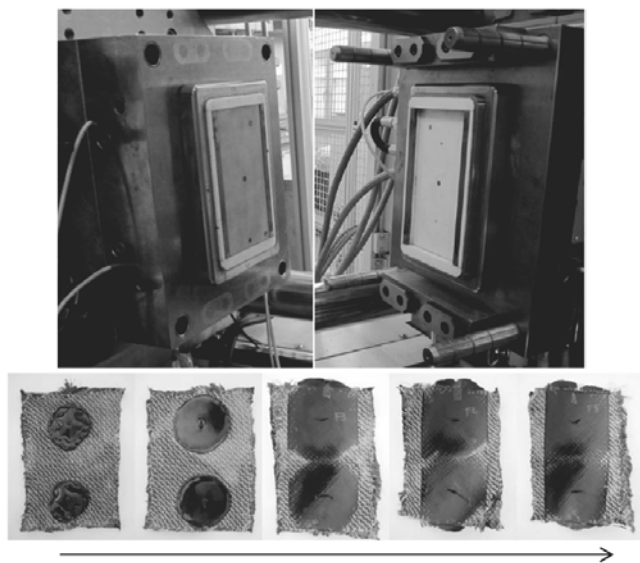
Test-piece mold installed in an injection-molding machine, and a filling study of the in-mold impregnation process [1]
